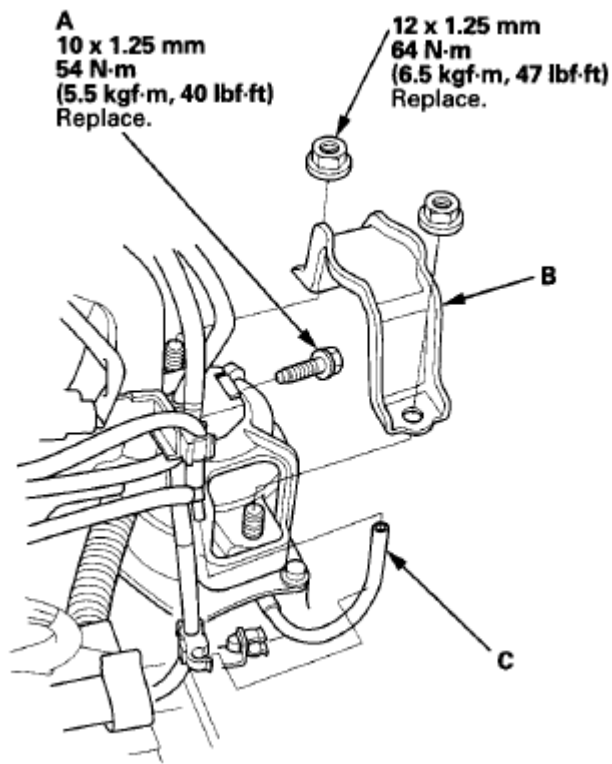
Installing Rear Engine Mount Bolt With Torque Specifications
